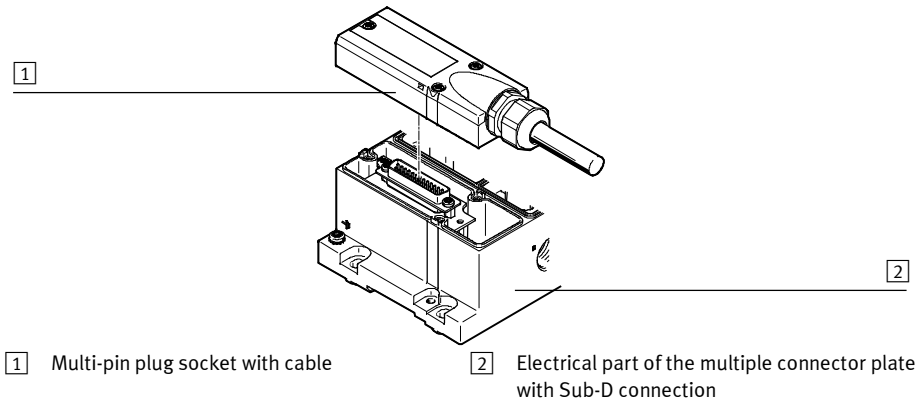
Electric components of the MPA-S valve terminal with multi-pin plug connection Sub-D
